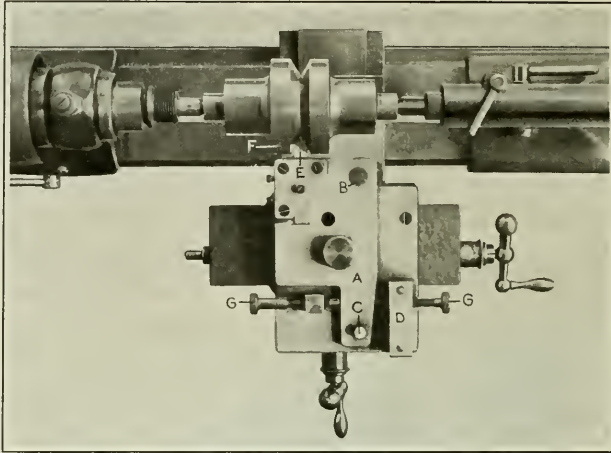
Adjusting Sine-bar Fixture by Means of a Master Plug
